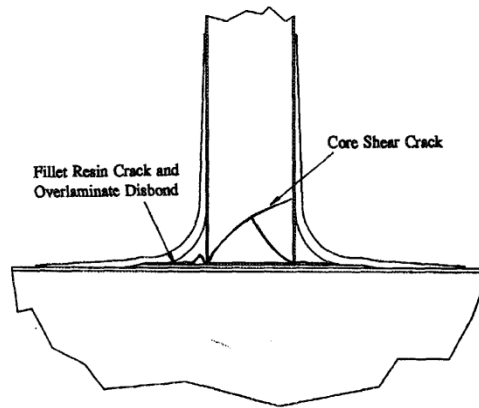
Failure mechanisms of sandwich T-Joints under 45° pull off loading
